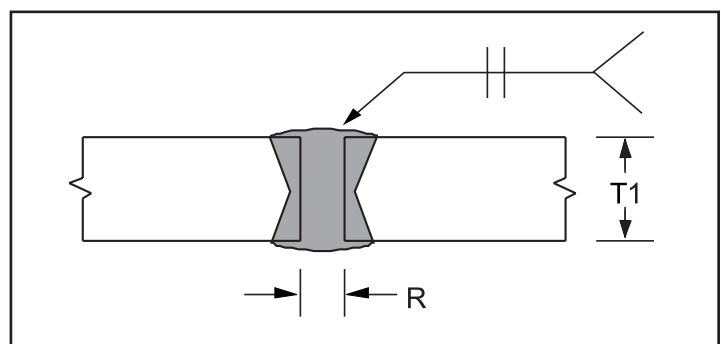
Prequalified AWS D1.1 joint detail B-L1-S (used with permission of the American Welding Society).
